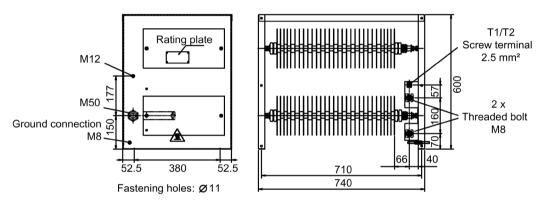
Dimension drawing braking resistor 25 kW/125 kW
